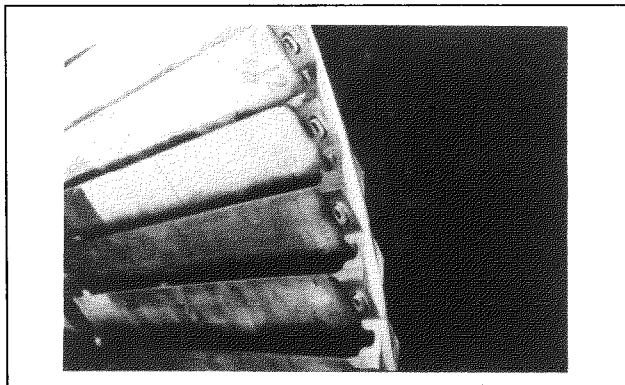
Side entry cover design of 26- and 33.5-inch redesigns
